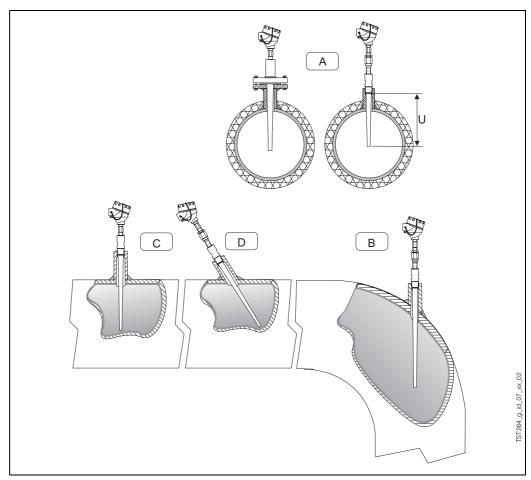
Installation on pipes and tanks by means of flanged or threaded process connections
